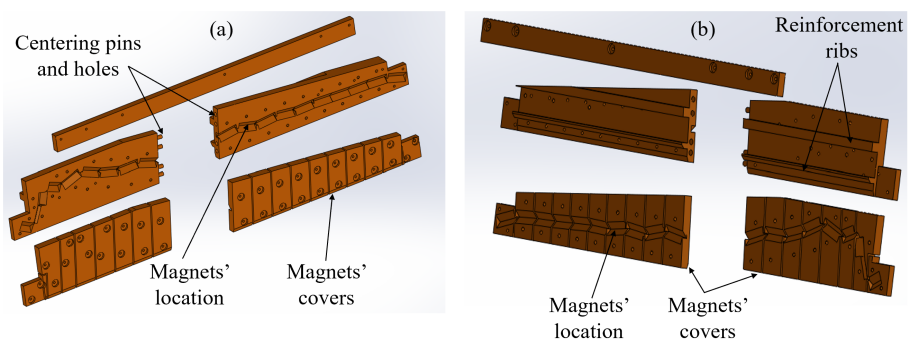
Exploded isometric view of magnets holder type II: (a) front view, and (b) back view.
